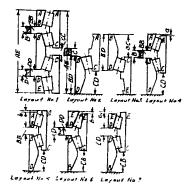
Consecutive Assembly Layouts for Four-Row Roller Bearings
